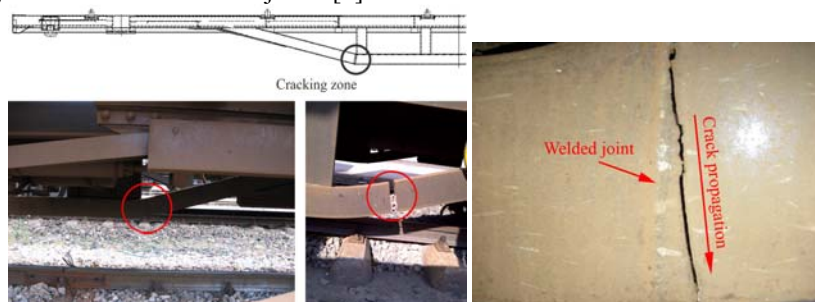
Crack nearby welded joint at the bottom side of underframe.
